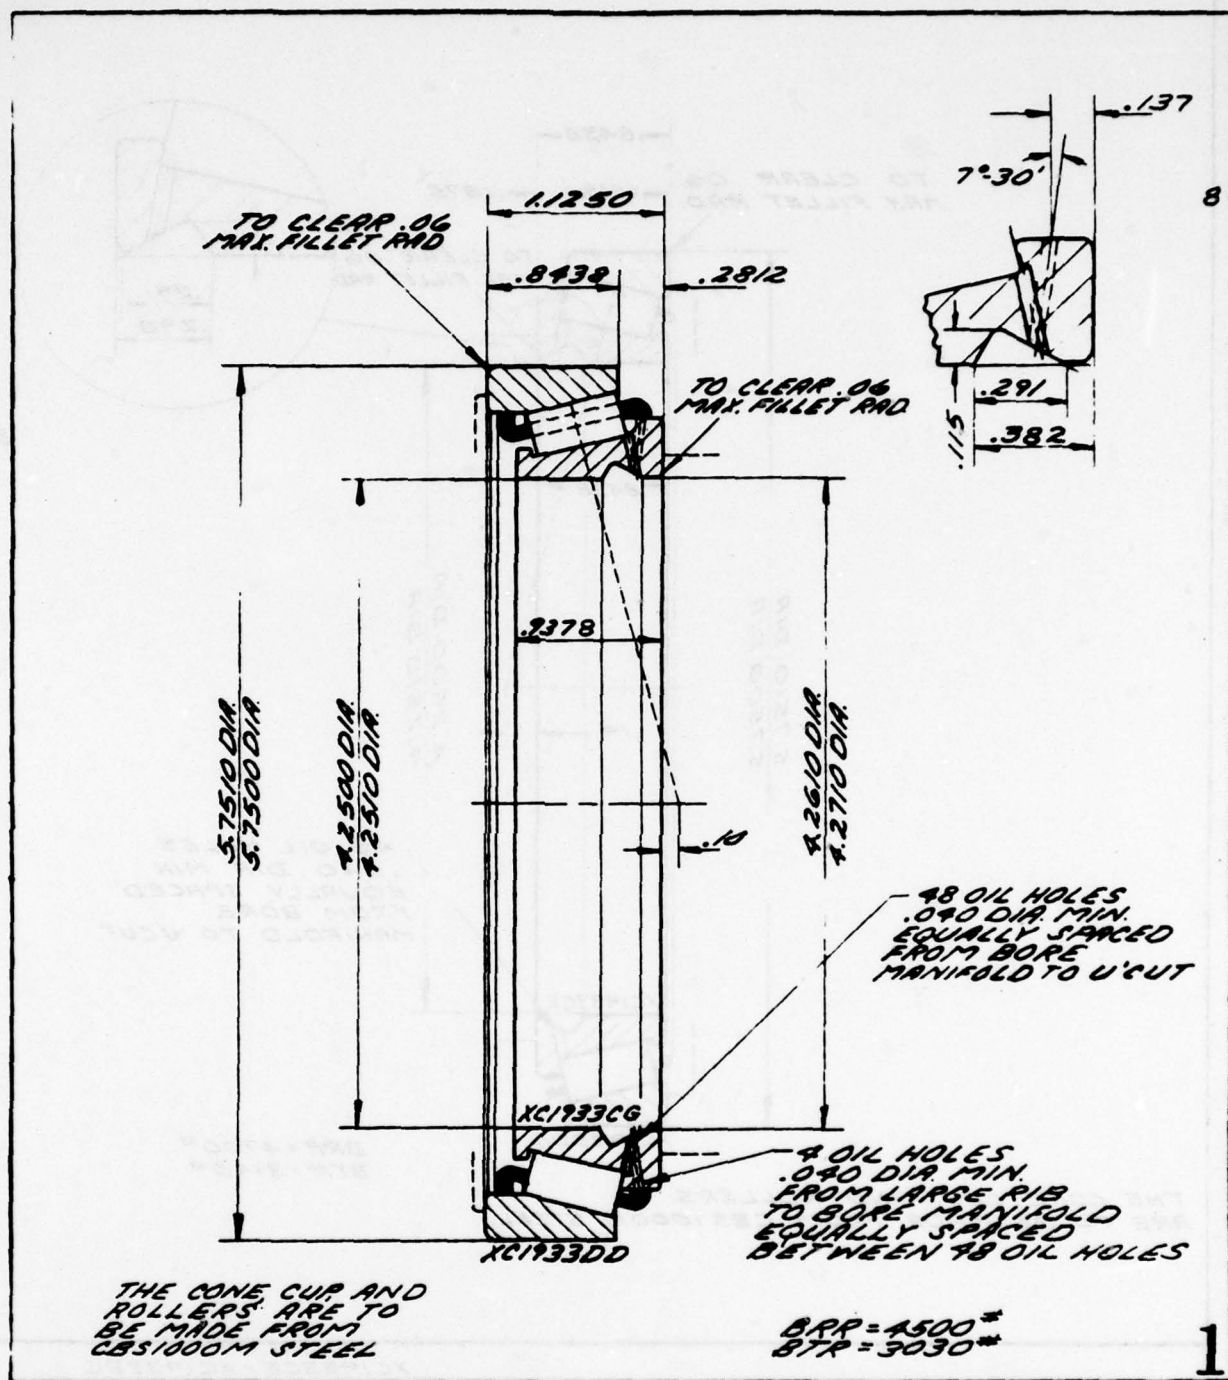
Race Guided Cage Bearing, XC1933CG-XC1933DD Assembly
